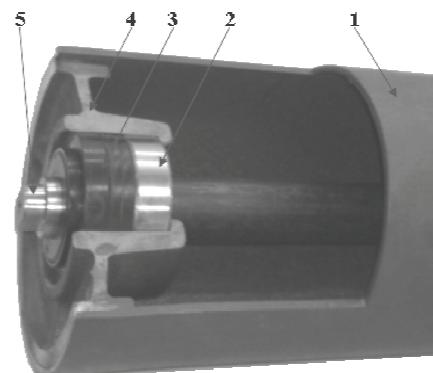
The construction of belt roller: 1 – jacket, 2 – bearing, 3 – labyrinth seal, 4 – cast iron hub, 5 – axle [9, 10]
